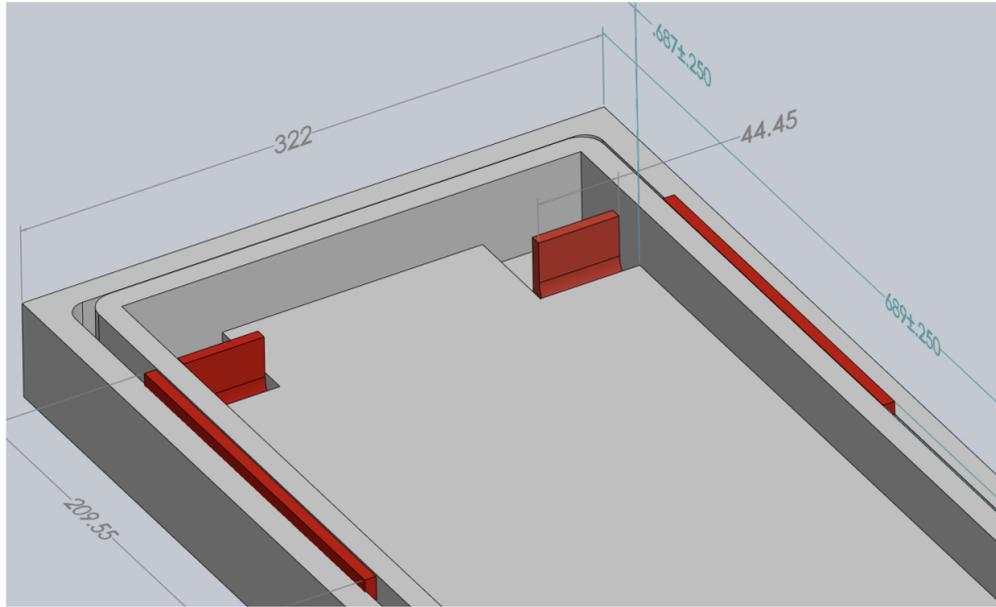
A SolidWorks model of the Metal and Gel Composite Damper placed in the isolette inner and outer trays. Dampers are outlined in red. All dimensions are in mm.
